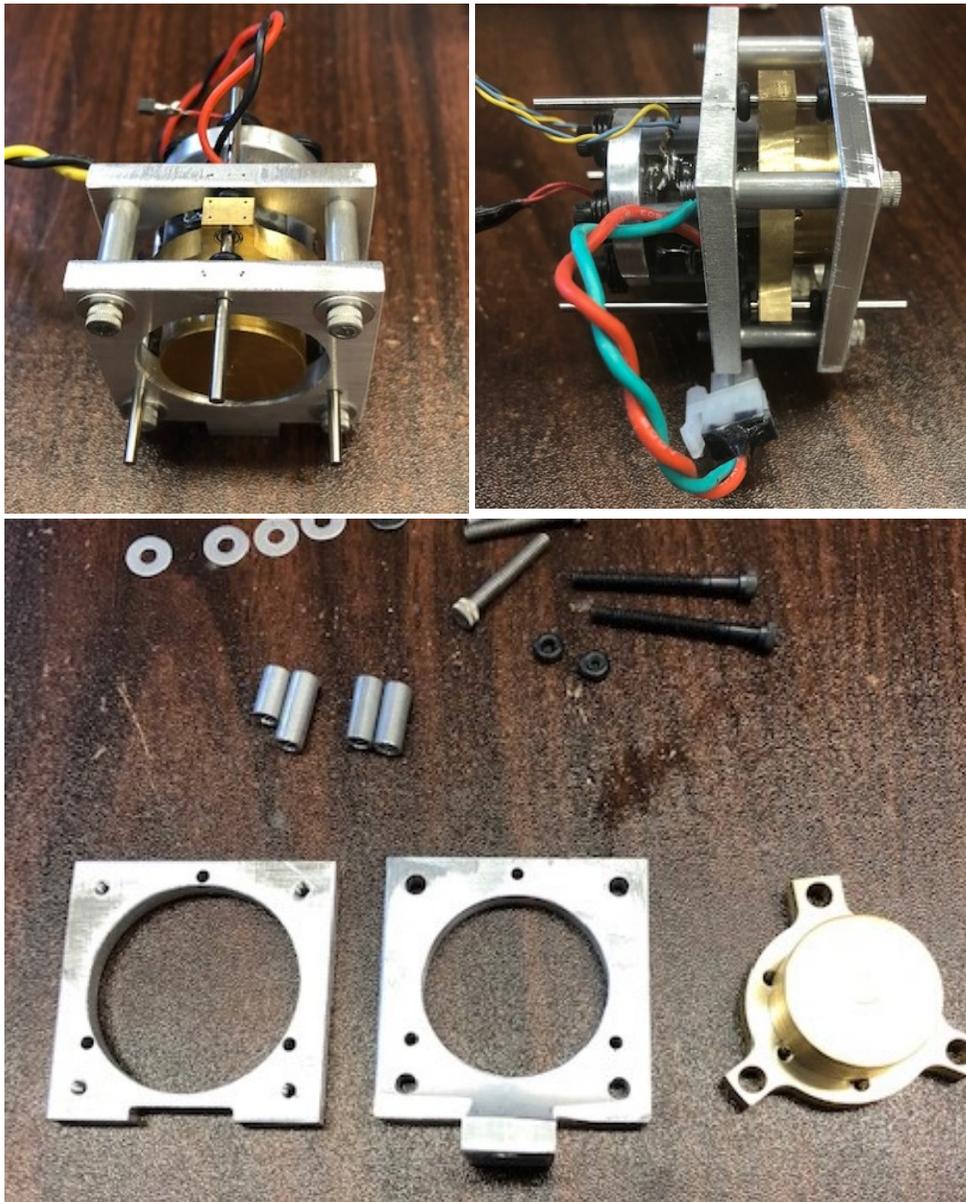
Photographs of the device assembly and parts. Note the small holes drilled into the brass “ear” and the square aluminum brackets top left. Linear ball bearings are fitted into the holes in the “ears” in the brass mass.
